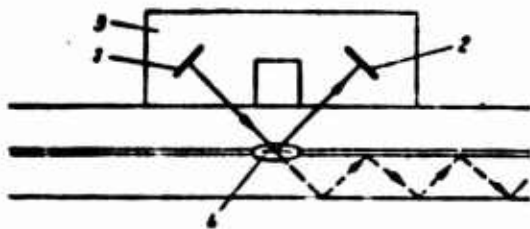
Diagram of check of quality of spot welding: 1 - radiating piezoelement; 2 - receiving piezoelement; 3 - housing of head; 4 - spilly place in weld point.
